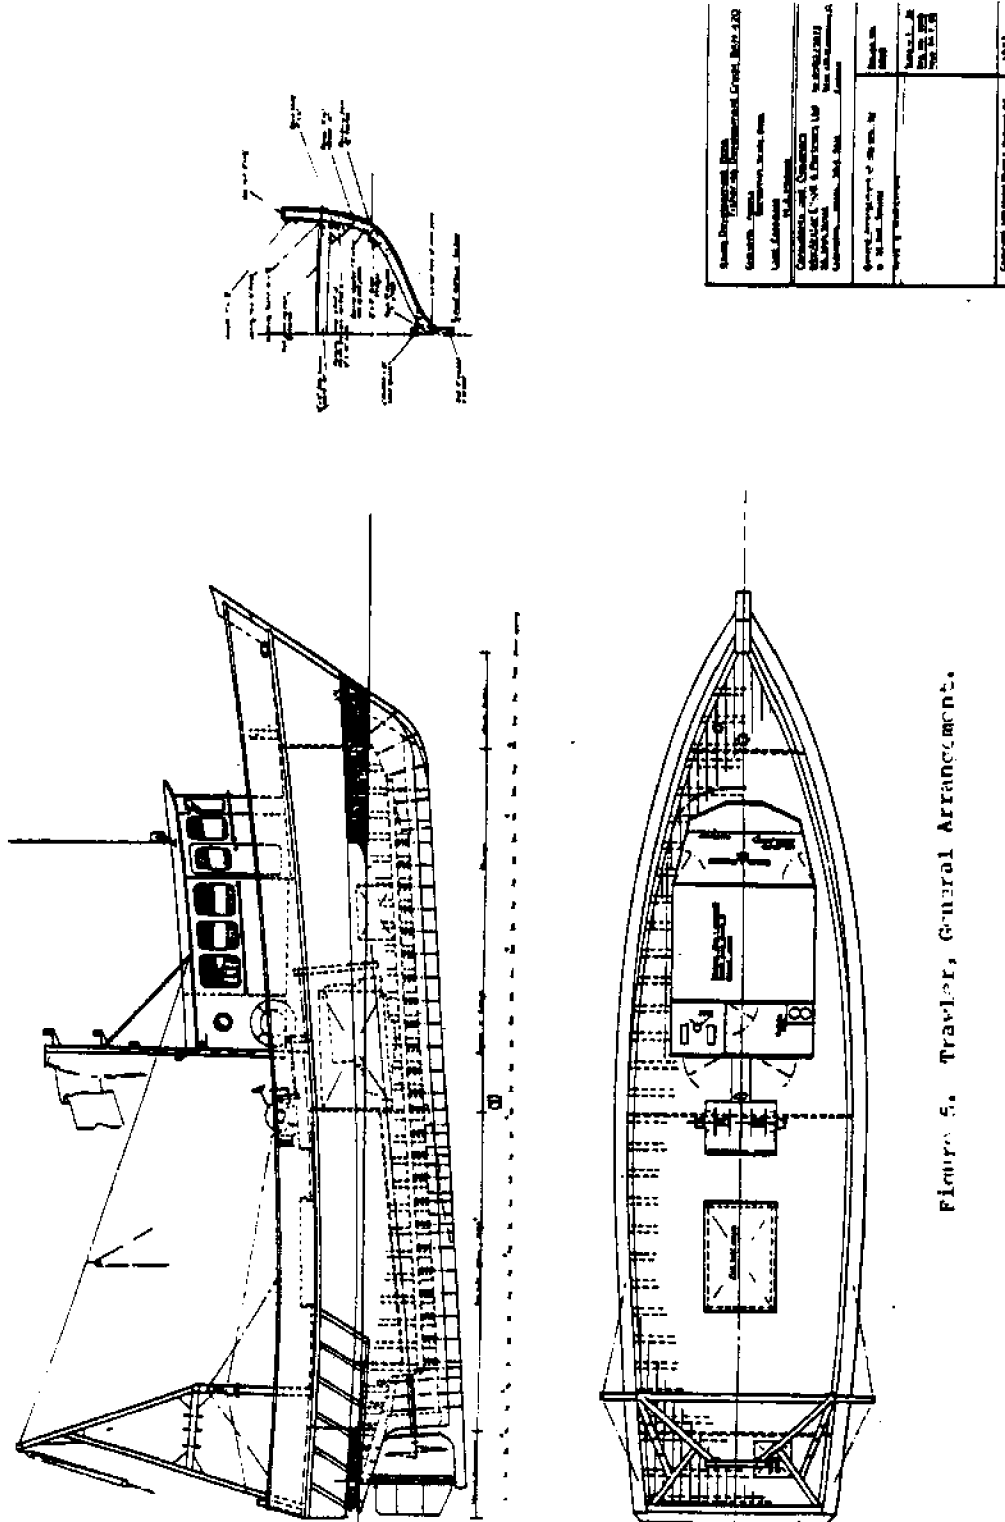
TRAVELER, GENERAL ARRANGEMENT.
